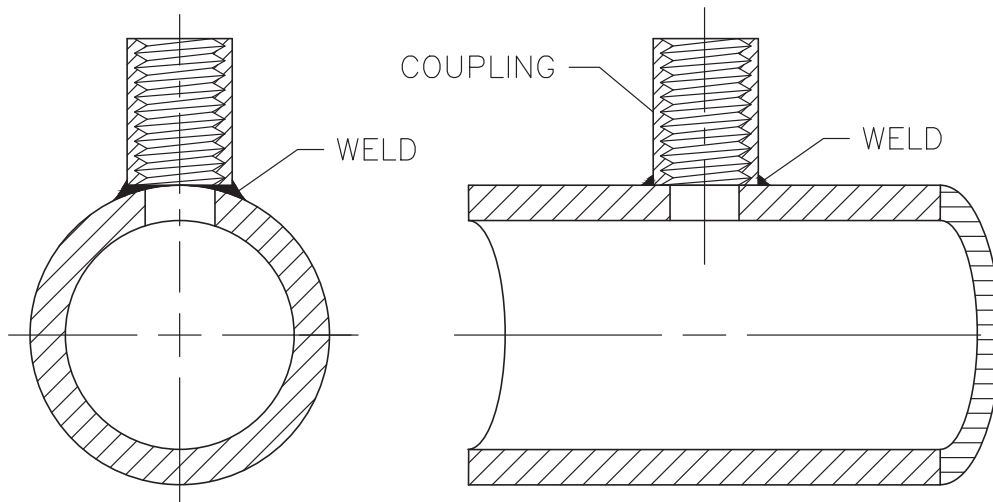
Welding a coupling onto a pipe header.
